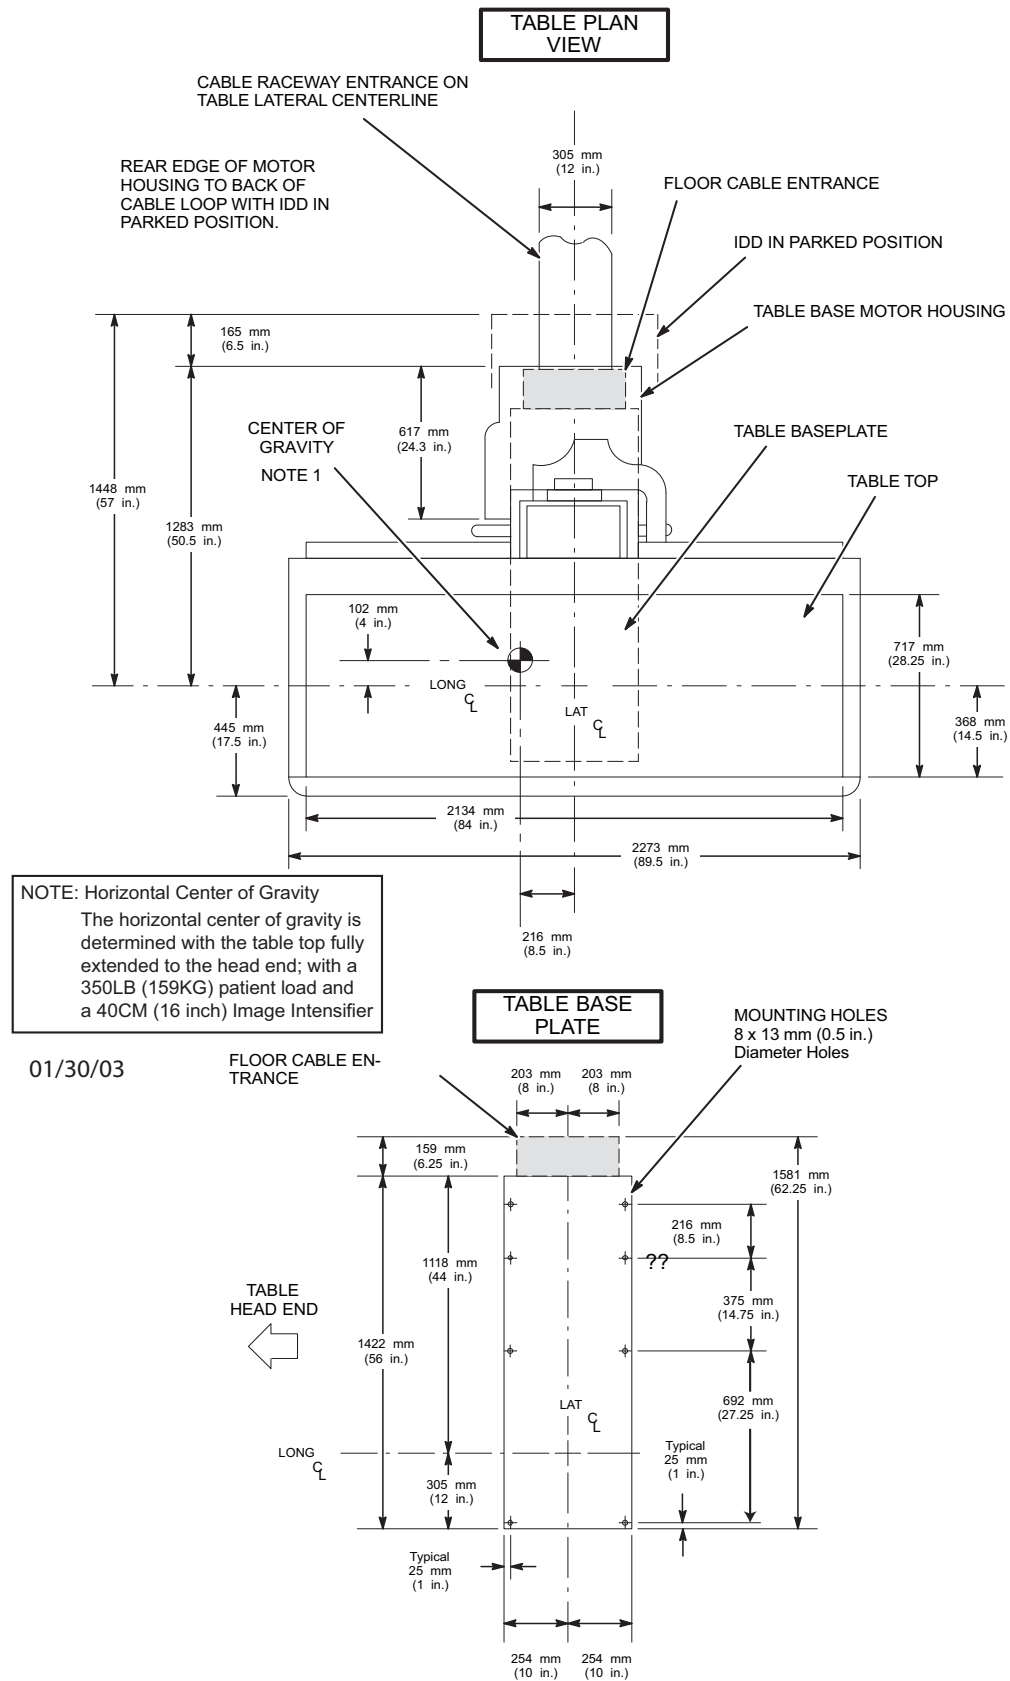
Table Dimensions (Table Base Plate and Table Plan View)
